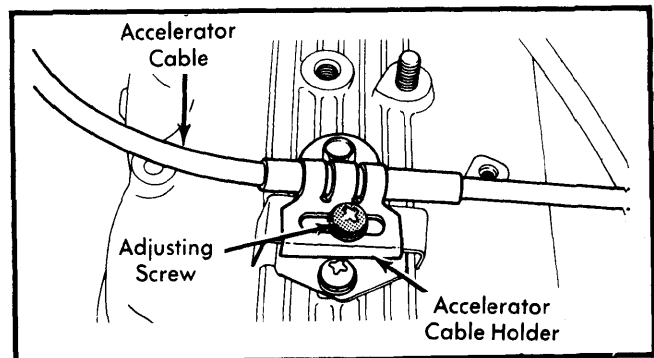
Adjusting Accelerator Cable (Arrow, Challenger, Ram 50 & Sapporo)
